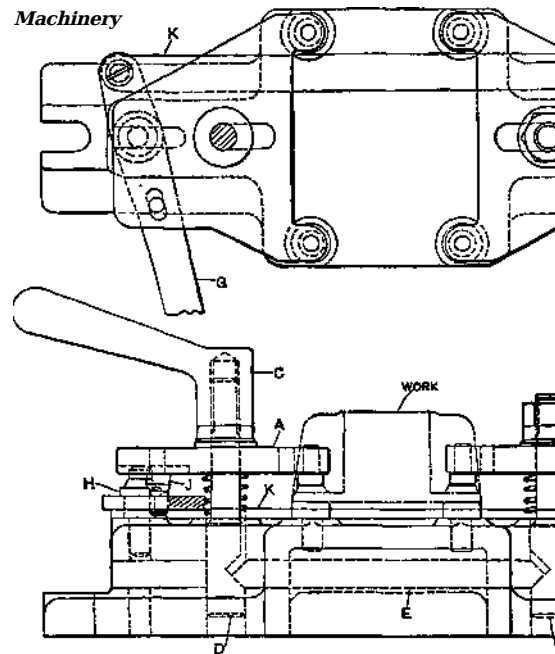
Fixture Designed for use on Lincoln Milling- Machine
